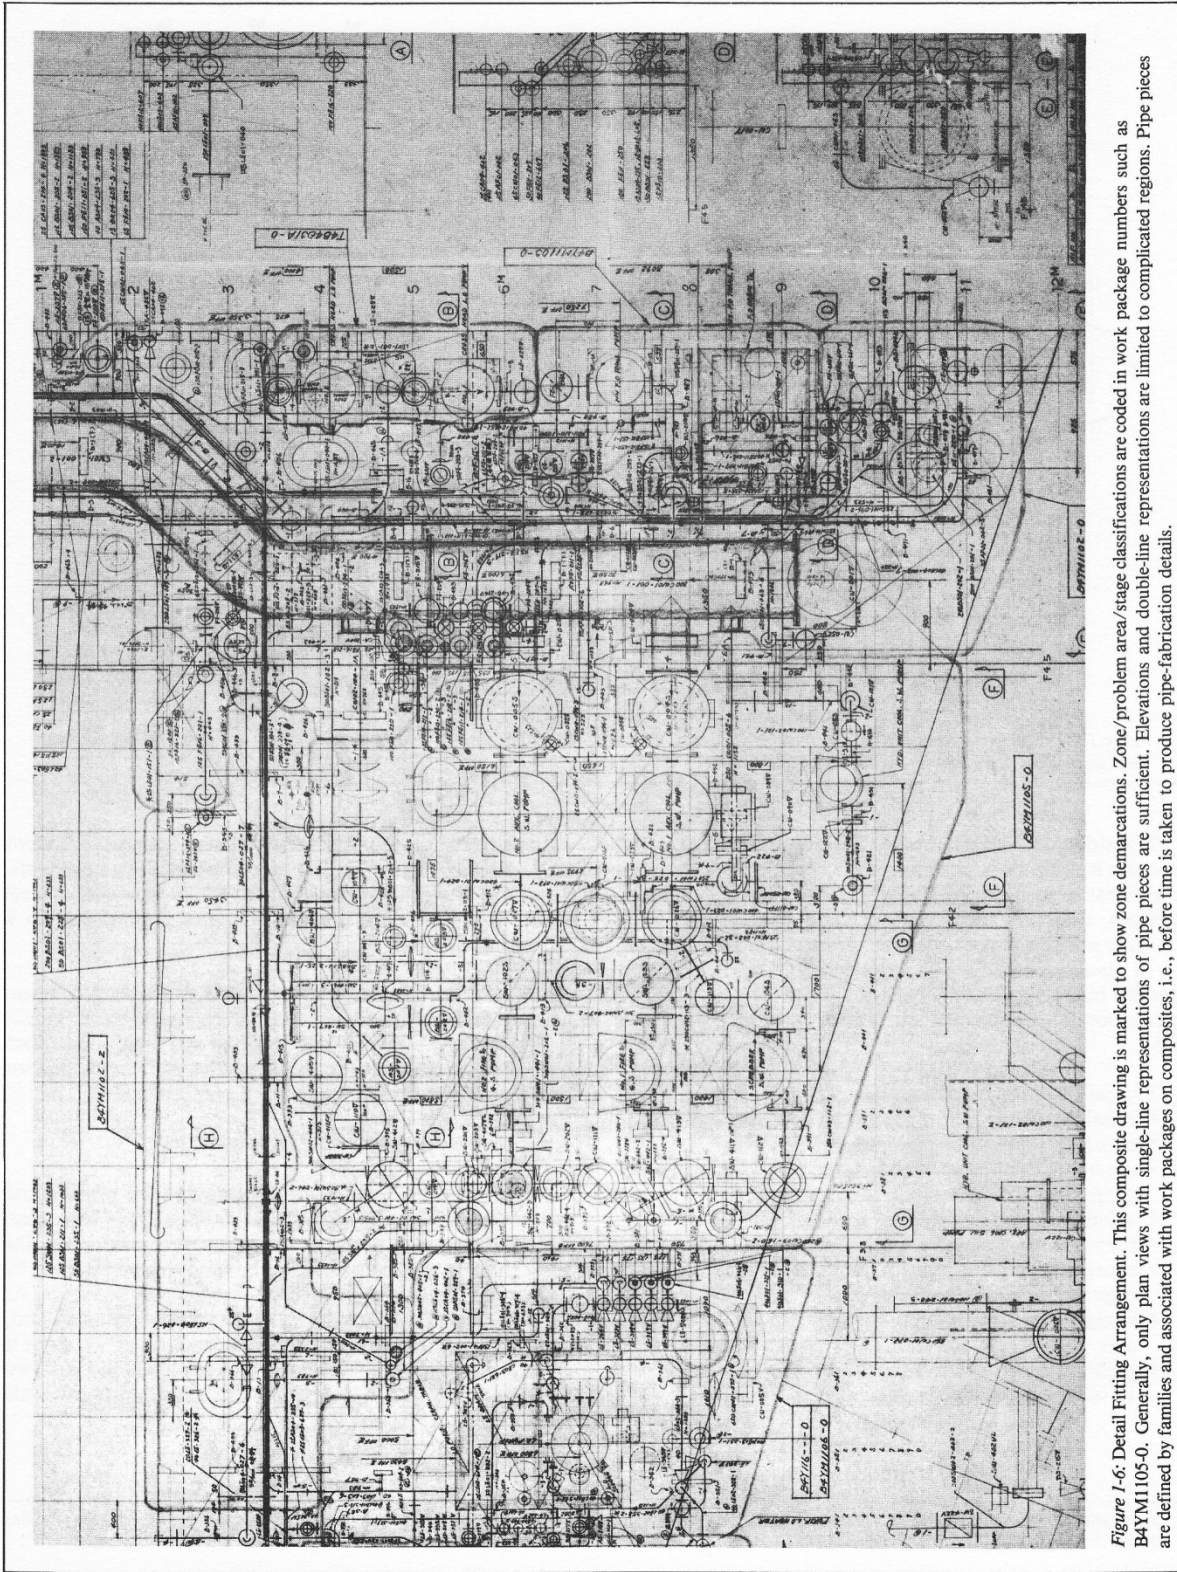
Detail Fitting Arrangement. This composite drawing is marked to show zone demarcations. Zone/problem area/stage classifications are coded in work package numbers such as B4YMI105-0. Generally, only plan views with single-line representations of pipe pieces are sufficient. Elevations and double-line representations are limited to complicated regions. Pipe pieces are defined by families and associated with work packages on composites, i.e., before time is taken to produce pipe-fabrication details.
